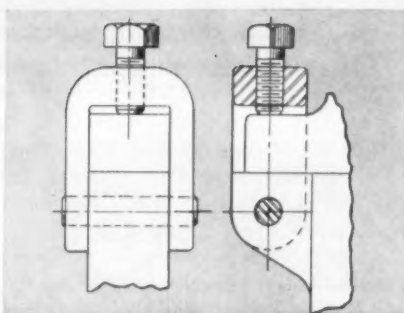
Drawing of interesting clamping arrangement utilizing strap-like clamp.
